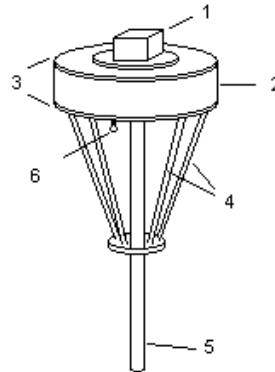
Basic Hull Design: 1. Electronics Box; 2. Foam Hull Body; 3. PVC Hull Plates; 4. Struts; 5. Linear Generator Housing; 6. Eye Bolt.
